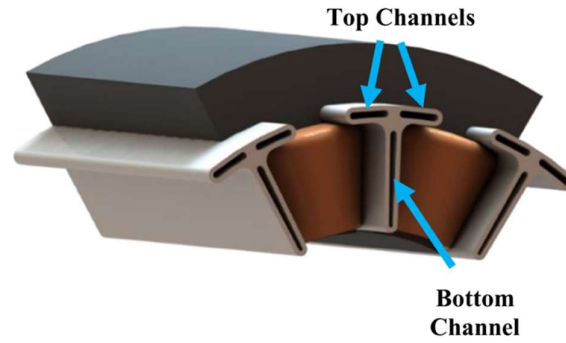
3D-printed direct winding HX for a double layer concentrated wound machine [12]
